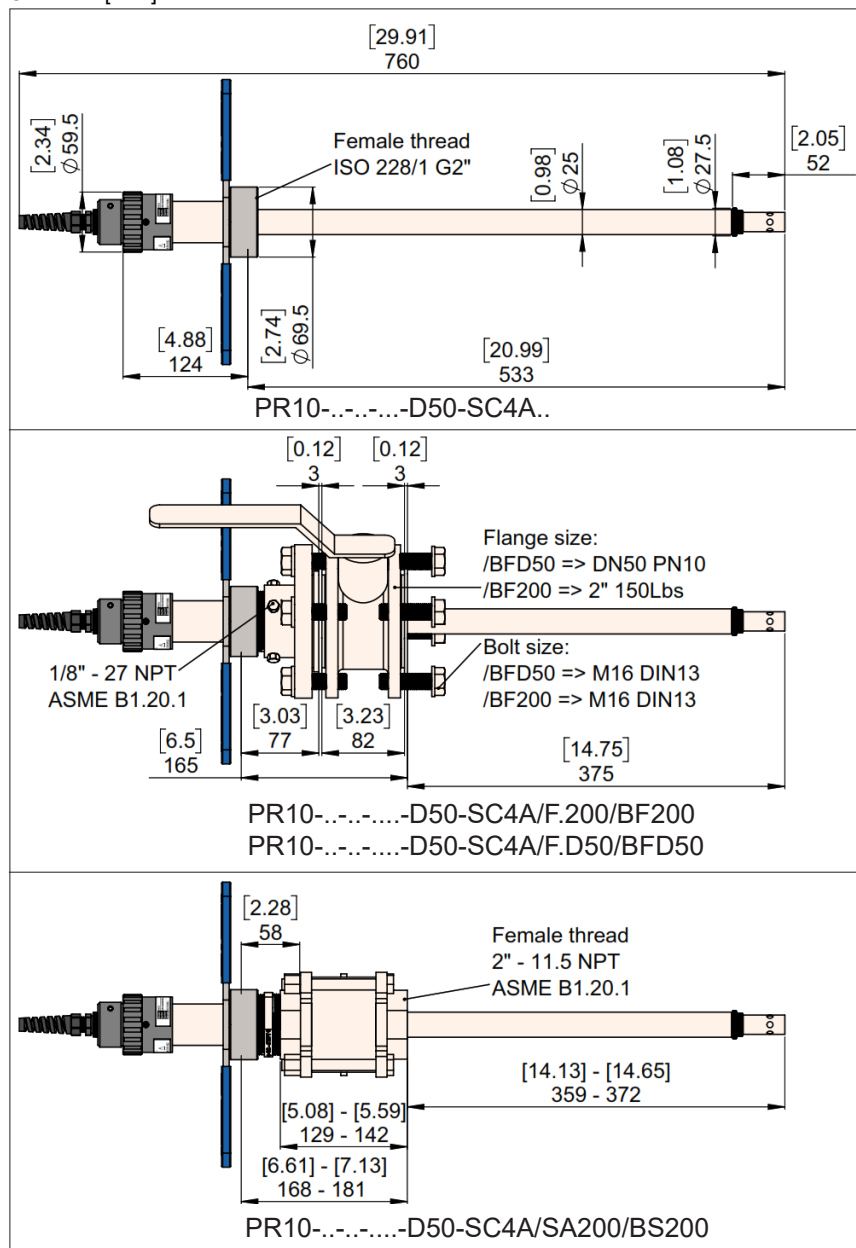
Dimensional drawing PR10...-D50 with mounted SC4A sensor
